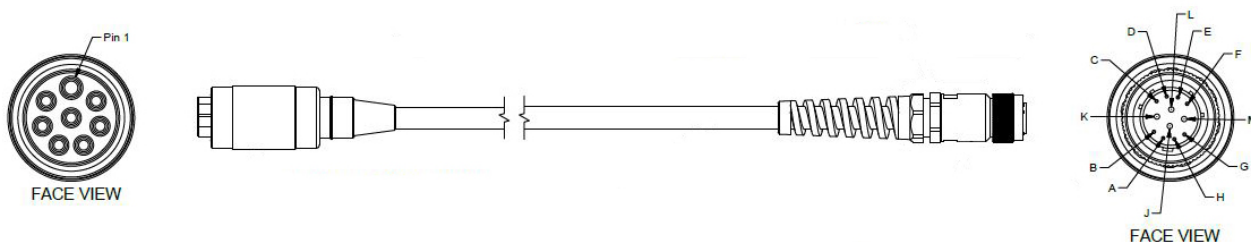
CPN 820-6793/DWG 8024-044 transceiver cable assembly 30 m
